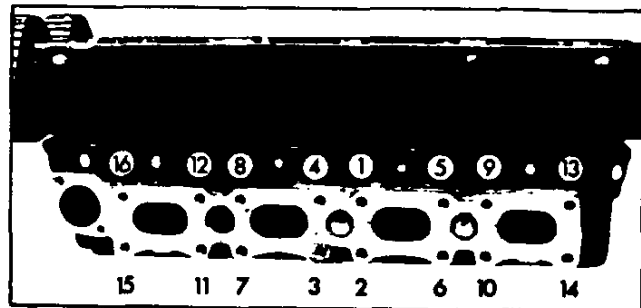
Exhaust Manifold Bolt Torque Sequence
